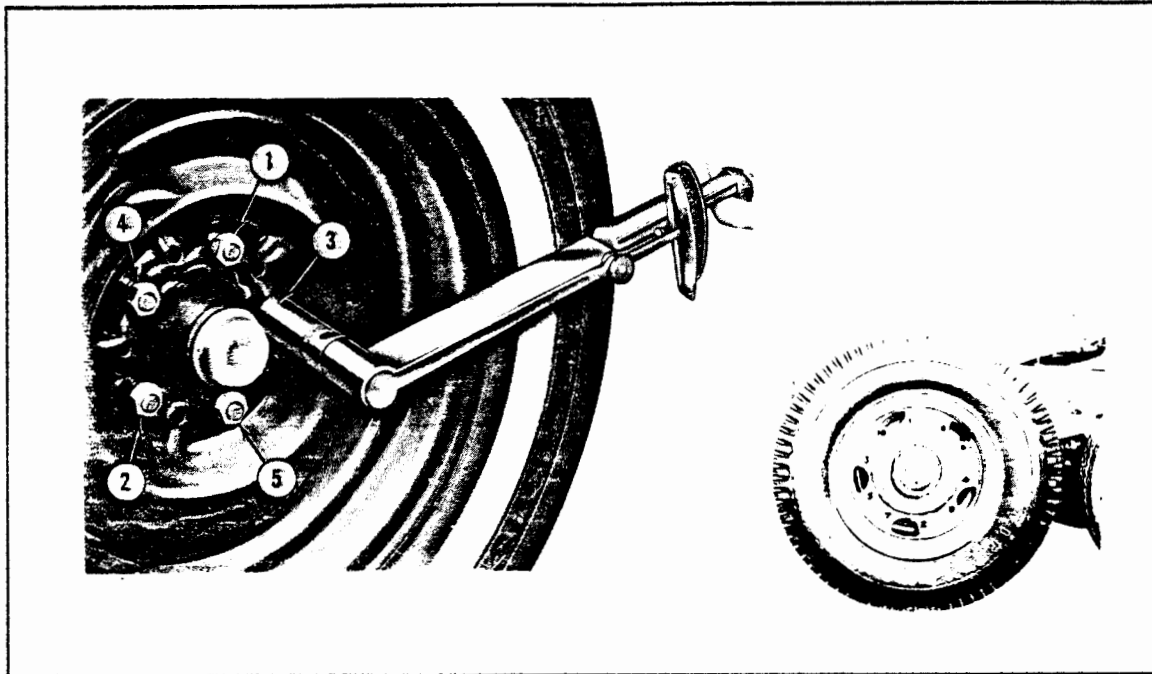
Disc Wheel Nut Tightening Sequence
